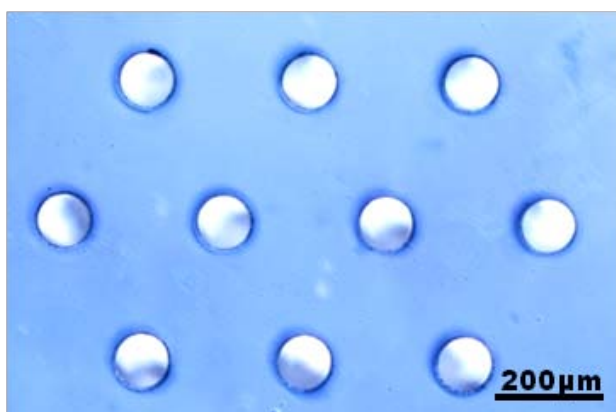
Micrograph of a fabricated array of ten Ø100 µm through holes using an automated drilling procedure. (drilling depth: 245 µm; feed rates: 0.8 µm/rev; cutting speed 20 mm/min; speed for lateral movements: 50 mm/min)
